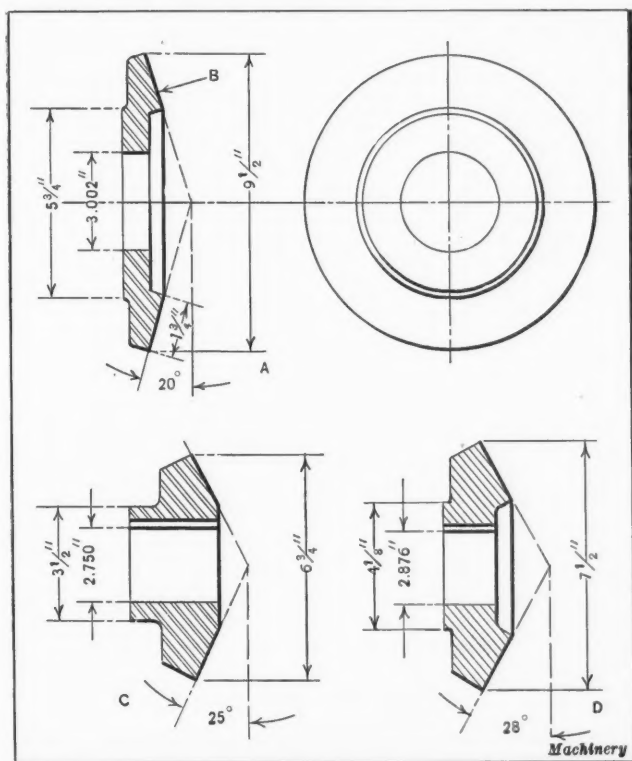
Bevel Gear Blanks to be machined in the Lathe by the Use of Special Attachments
